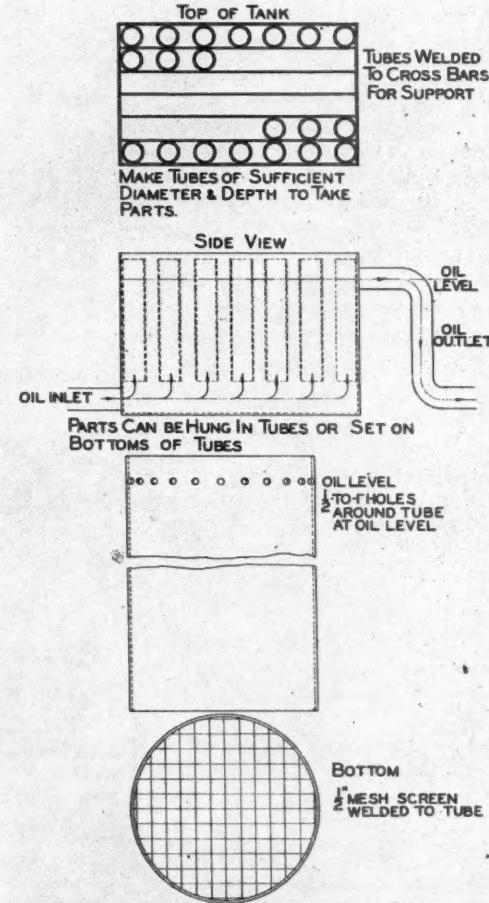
This sketch shows an excellent method used by some gear plants for controlling the uniform quenching of transmission gears. Essentially, this method comprises the use of tubes or pipes of suitable diameter to accommodate the gears. Oil flows up through each individual tube and out through the overflow at the top of the tank.
